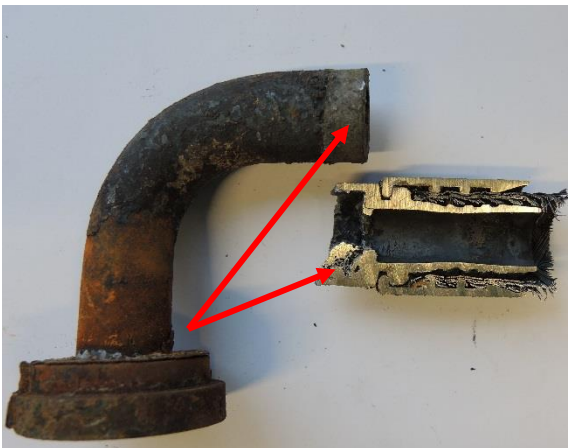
Broken hose end fitting. The red arrows mark the aluminium in the soldered hose end fitting. Photo: AIBN
